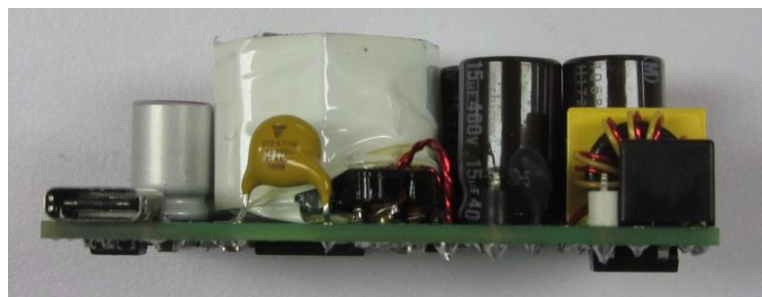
Populated Circuit Board Photograph, Entire Assembly.
